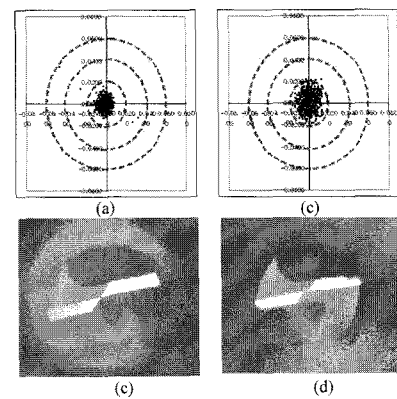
The Accuracy of of punching and the blade shape change of unimplanted PCB drills.
